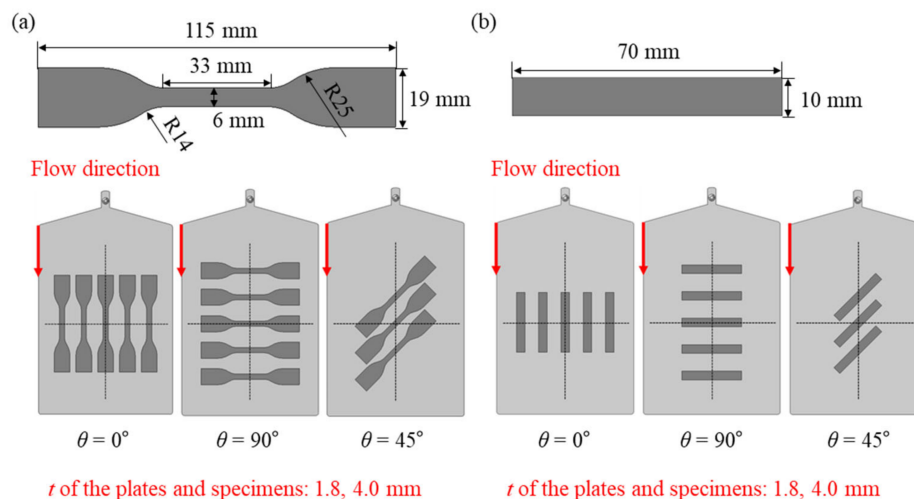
(a) ASTM-D 638-02a-Type IV specimen dimensions and cutting location of the tensile specimens from the plate, (b) ASTM-D3410M-16 specimen dimensions and cutting location of the compressive specimens from the plate.
